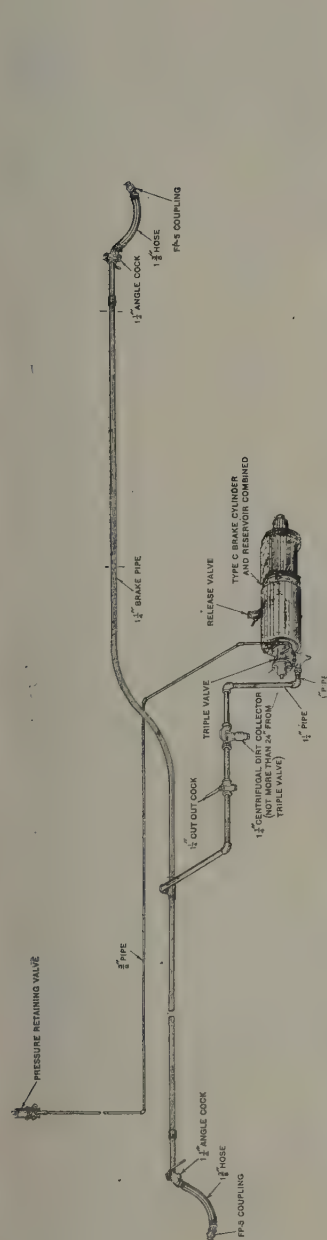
Piping Diagram of Standard Single Cylinder Freight Brake Equipment, Schedule KC.
